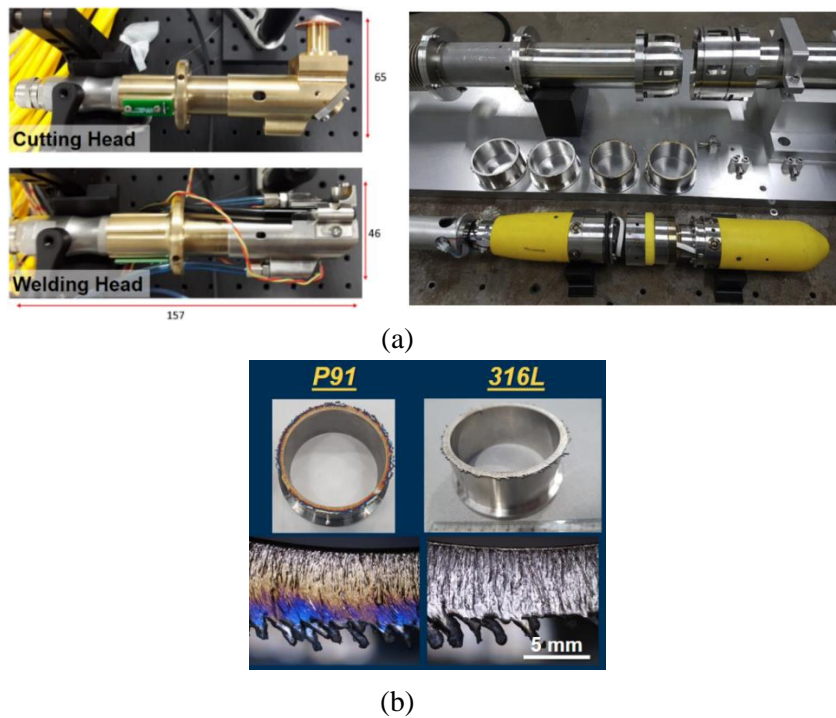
Remote in-bore laser cutting tool: (a) Miniaturized laser cutting head and cutting test rig [8], [110], and cut quality of the 5mm SS316 and P91 pipes [111]
